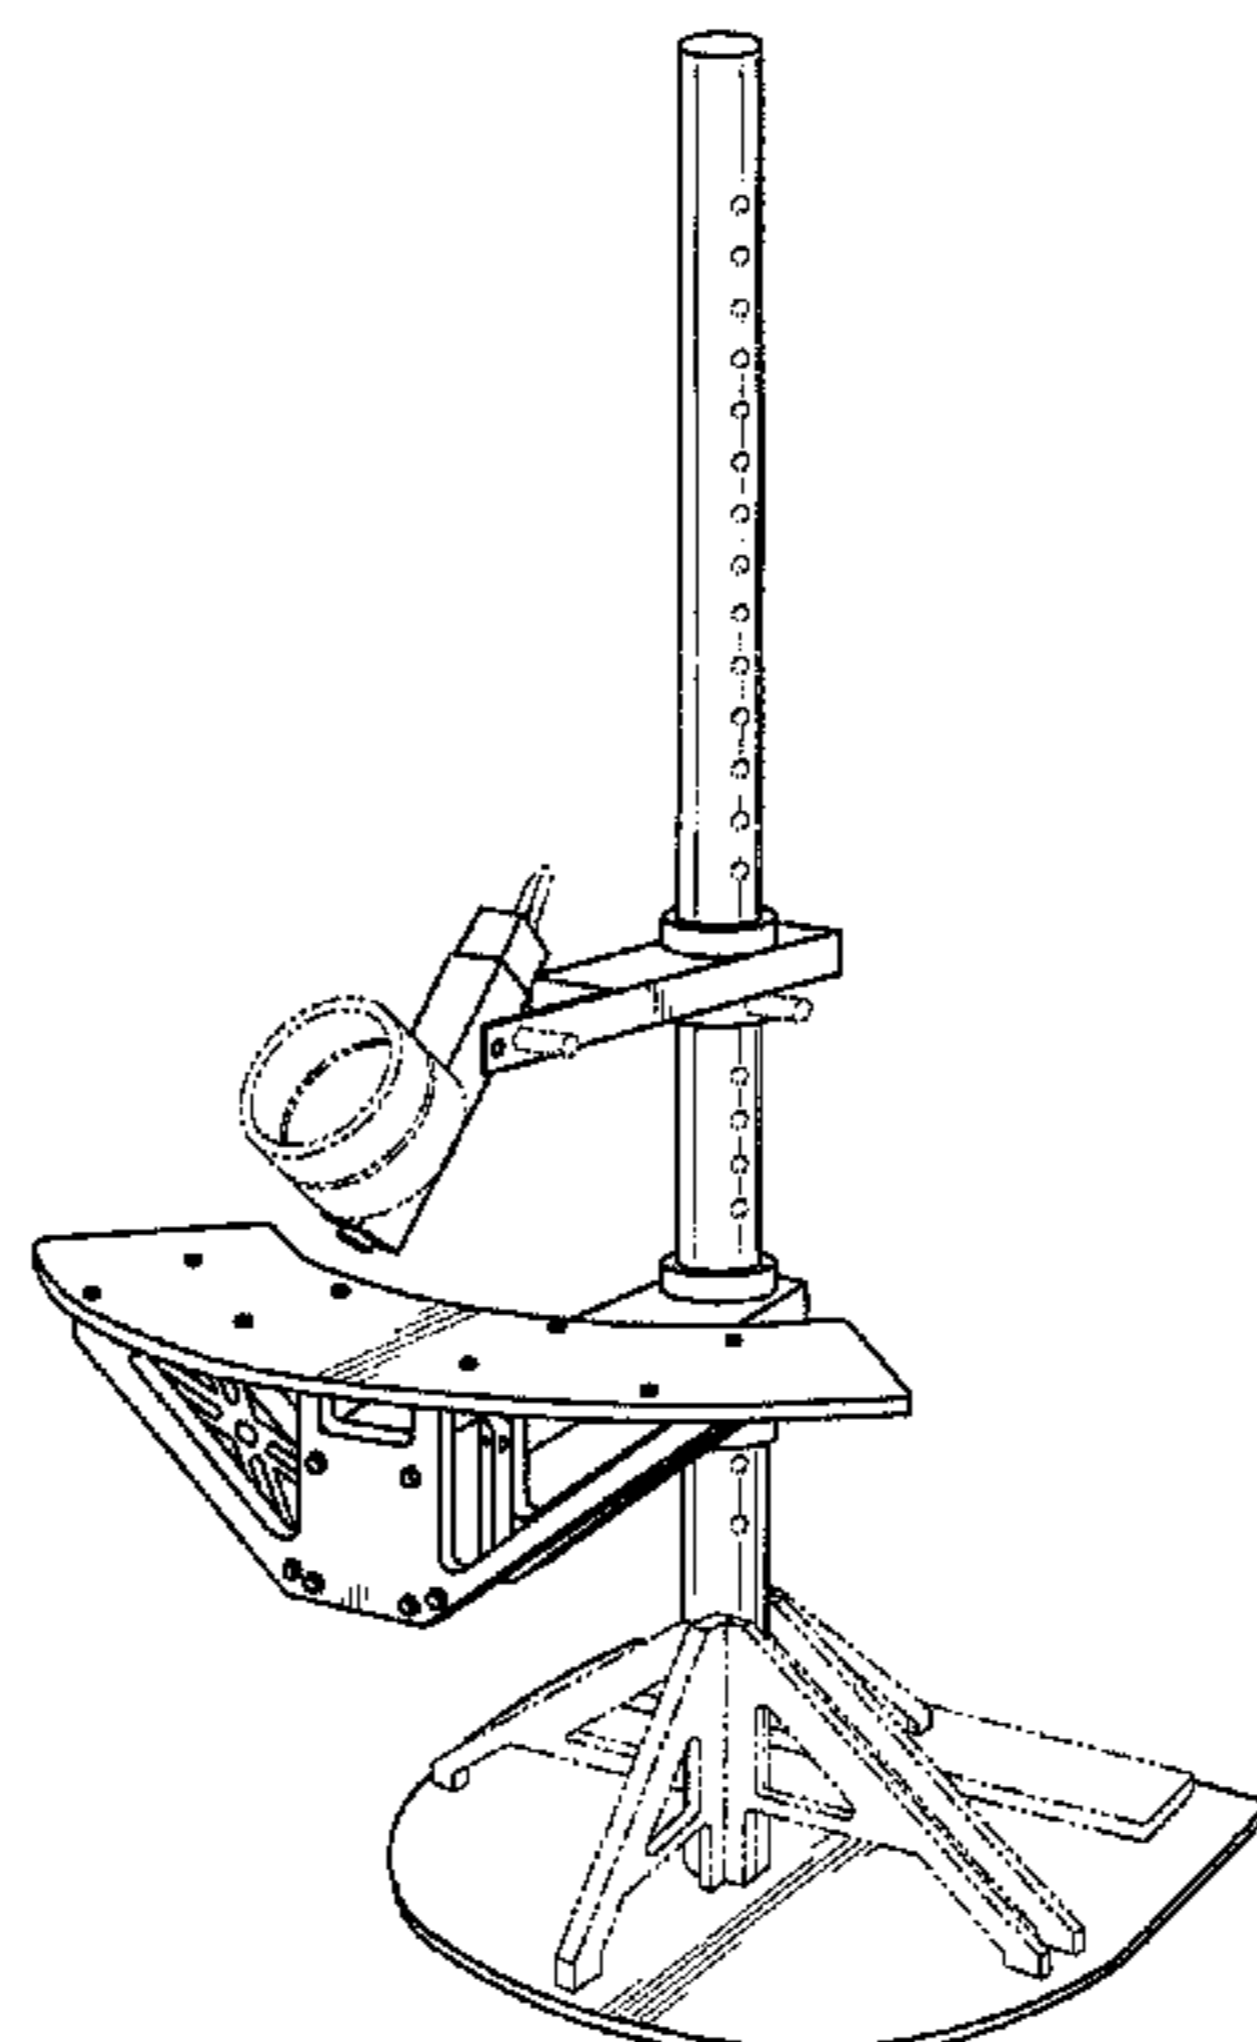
is a left side view of the simulator welding coupon stand of the embodiment illustrated in FIG. 7;
